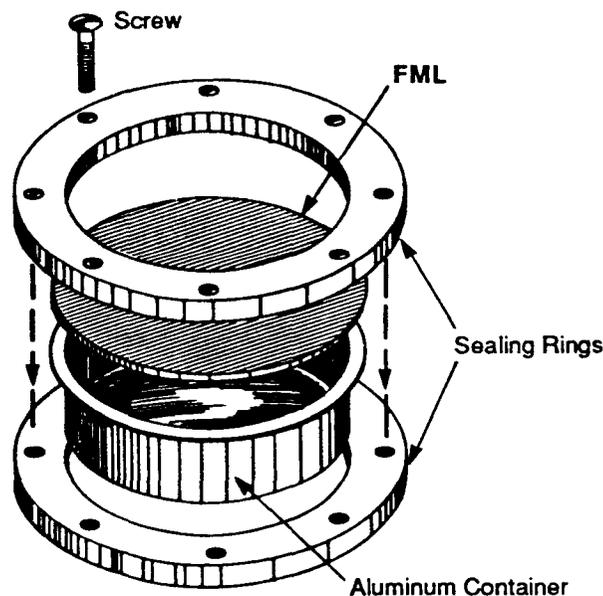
Exploded view of SVT cup with aluminum sealing rings.
